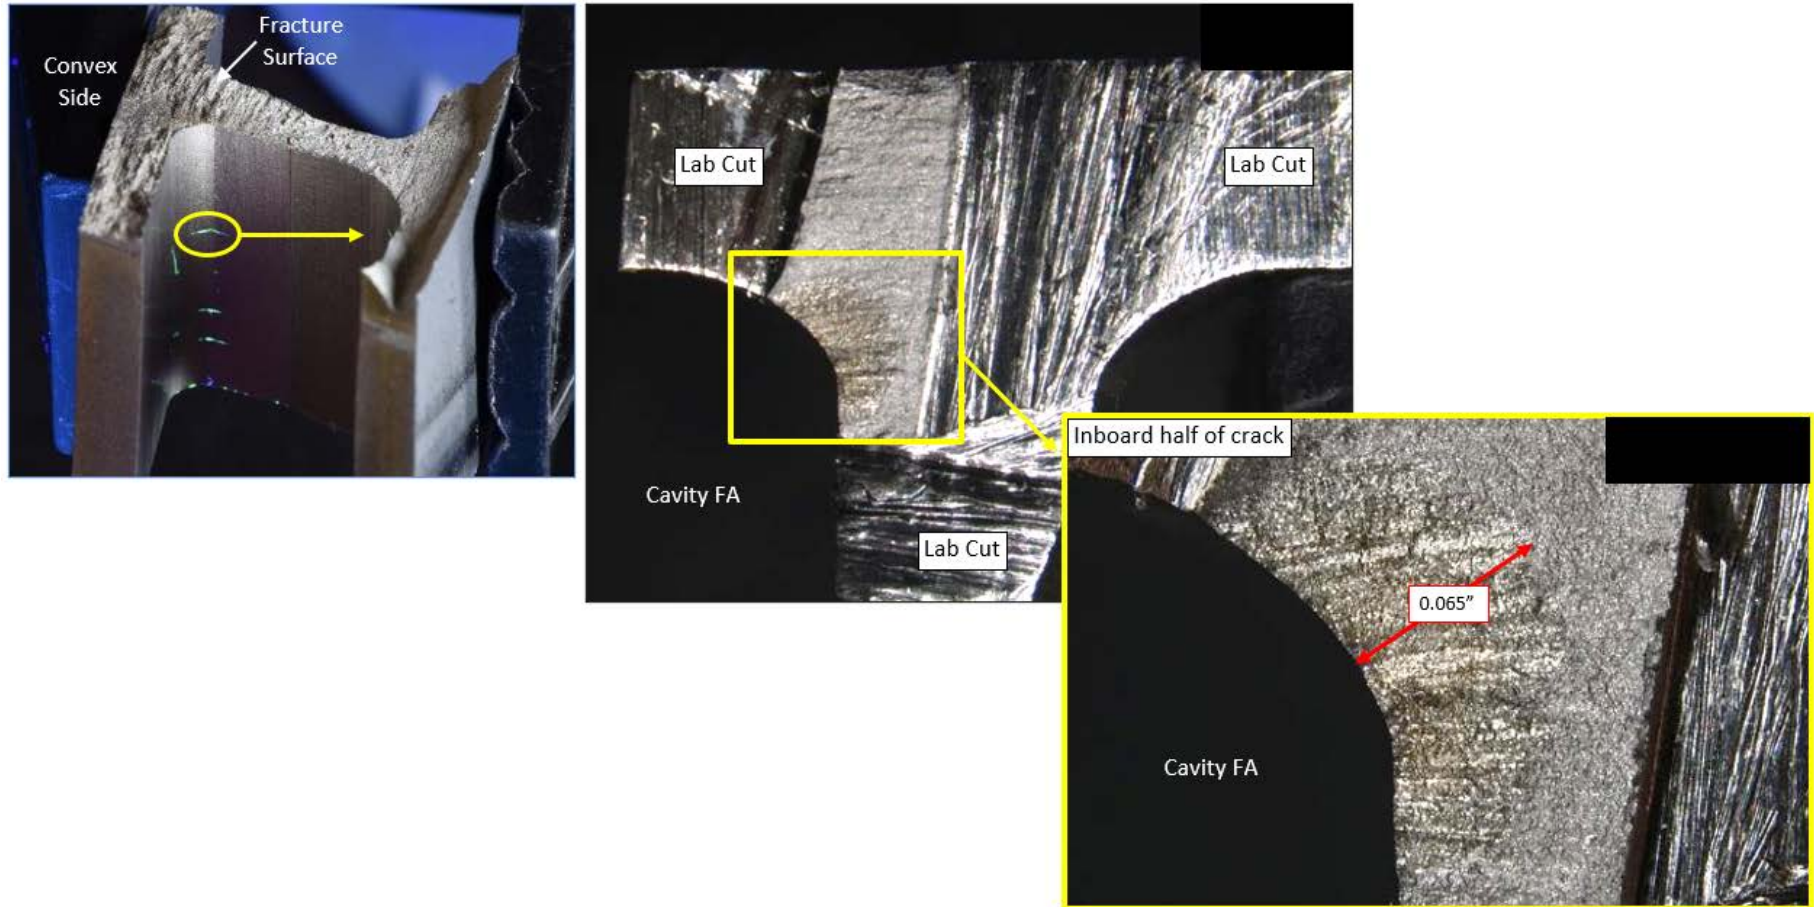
The largest of the secondary chordwise cracks inboard of the fracture surface was lab fractured open. The maximum crack depth measured 0.065”.
